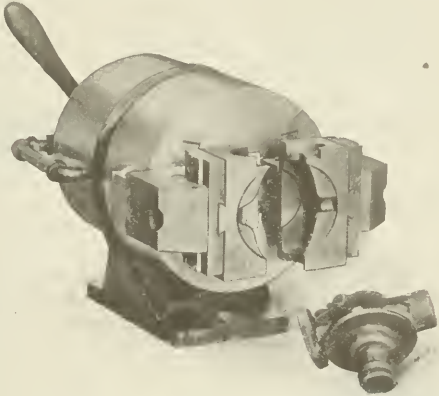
Opposite Side of Carburetor Body Milling Fixture shown in Fig. 1
